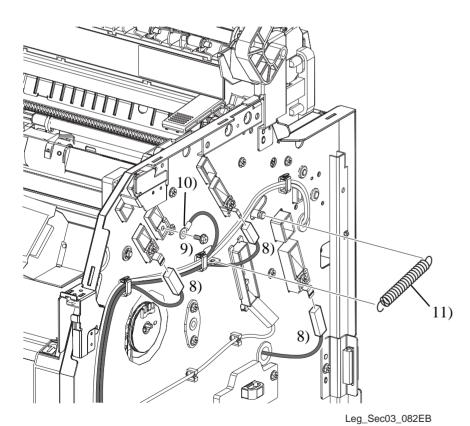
Removal of GUIDE CRU ASSY AD (2)
